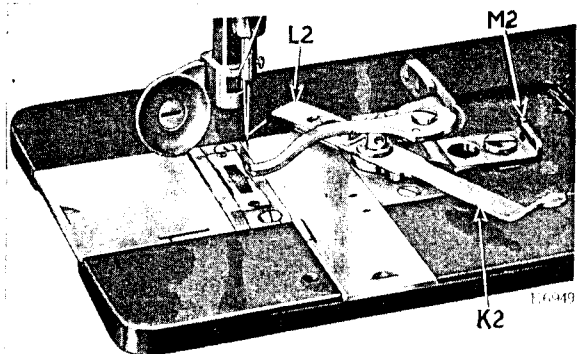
TRIMMER ON MACHINE 101 w 121 DISENGAGED
